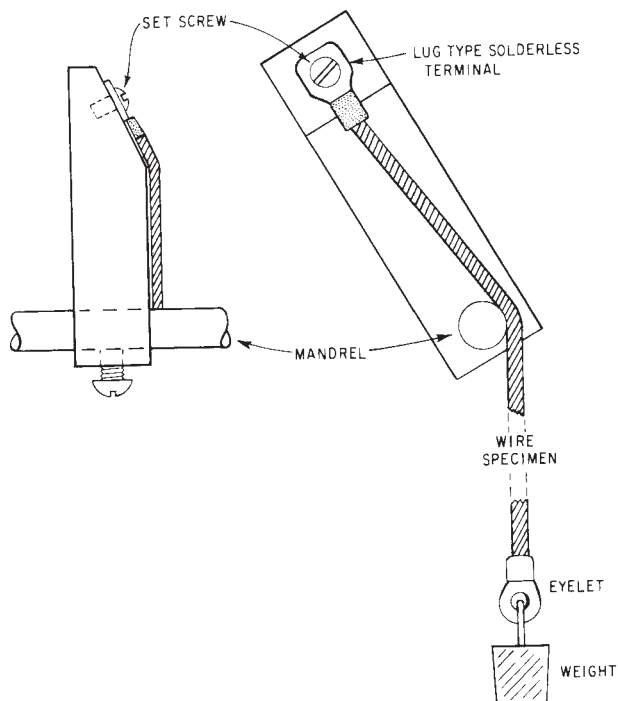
Method of Attachment of Wire Test Specimen to Mandrel
